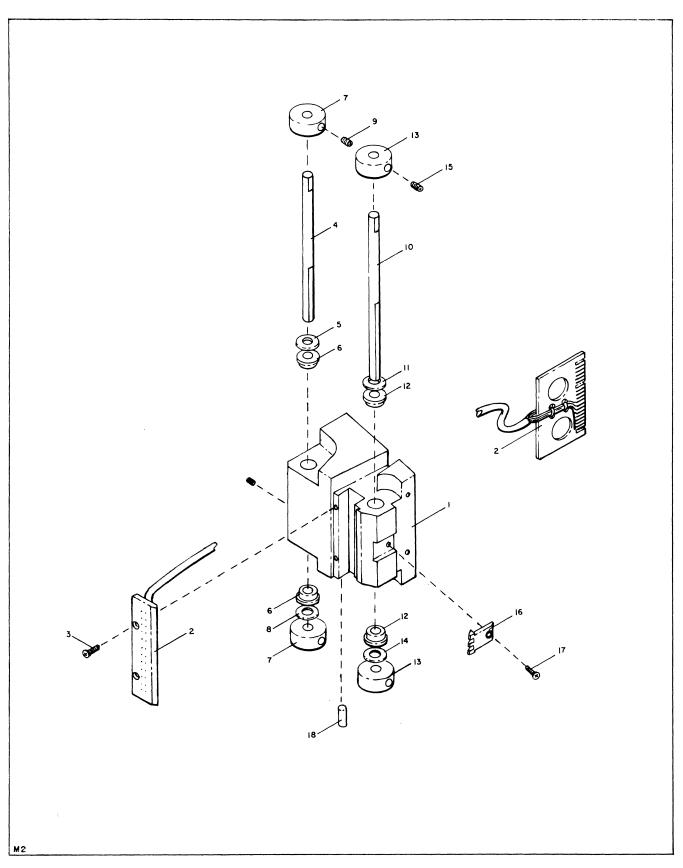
DRIVE ROLLER SUPPORT ASSEMBLY
